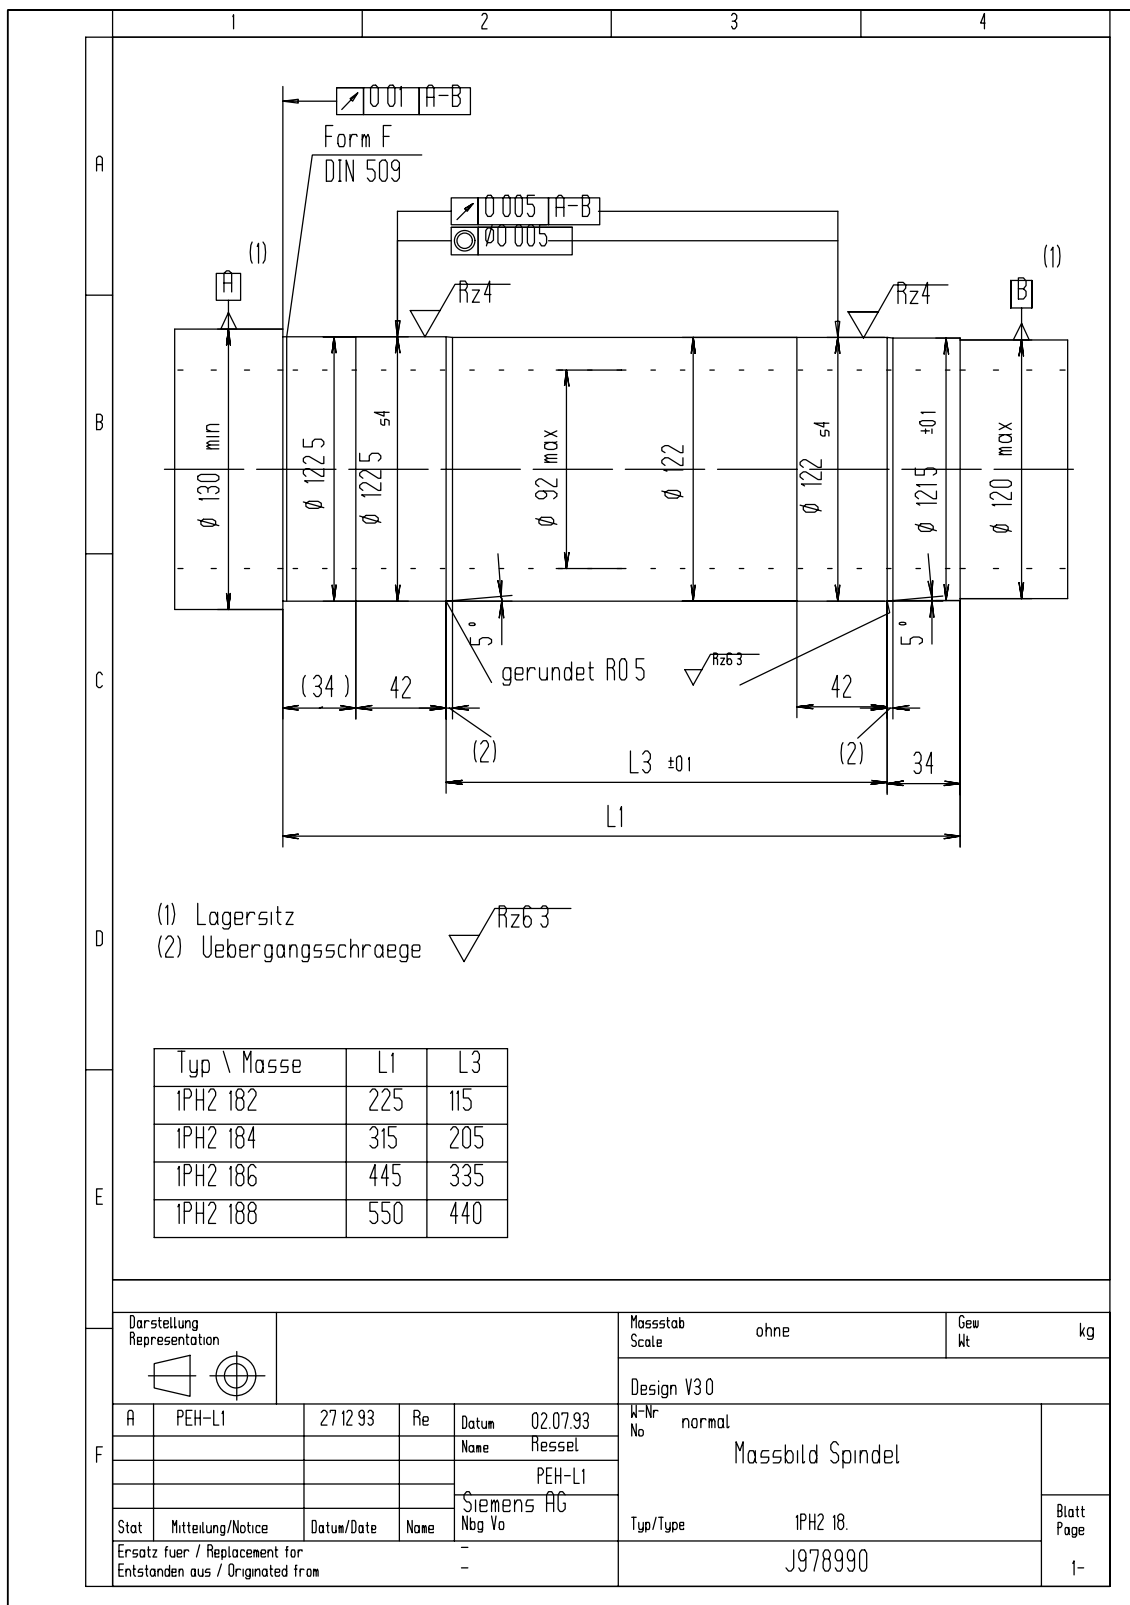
1PH218□-6W motor dimensions (dimension drawing)
